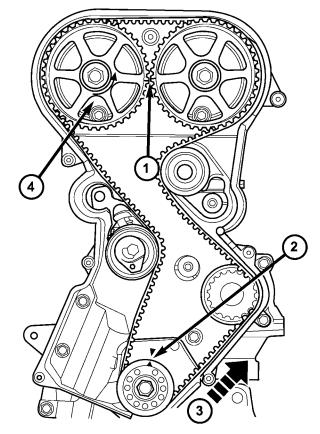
Camshaft Sprocket Alignment For Timing Belt Installation
